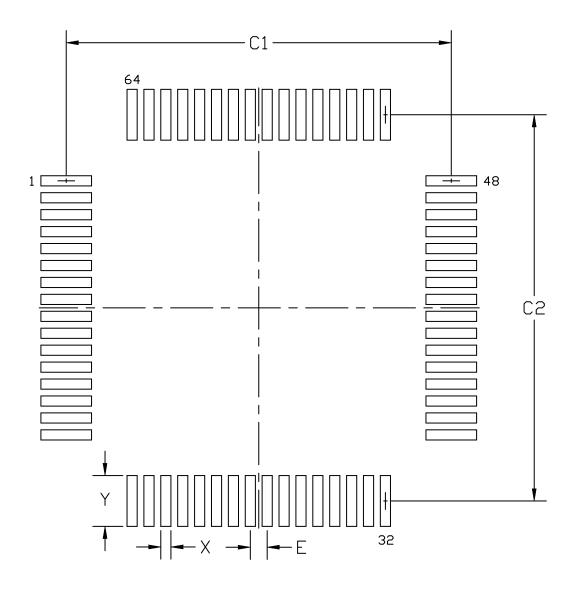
TQFP64 PCB Land Pattern Drawing
